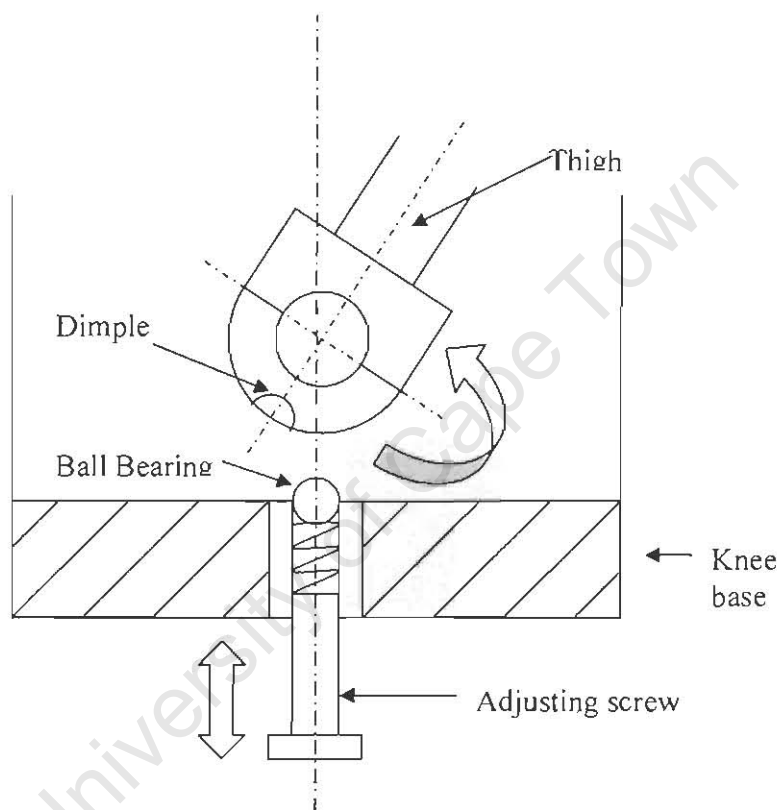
Socket and ratchet mechanism: Spring loaded ball bearing housed in base of knee, mates with dimple on thigh end.
